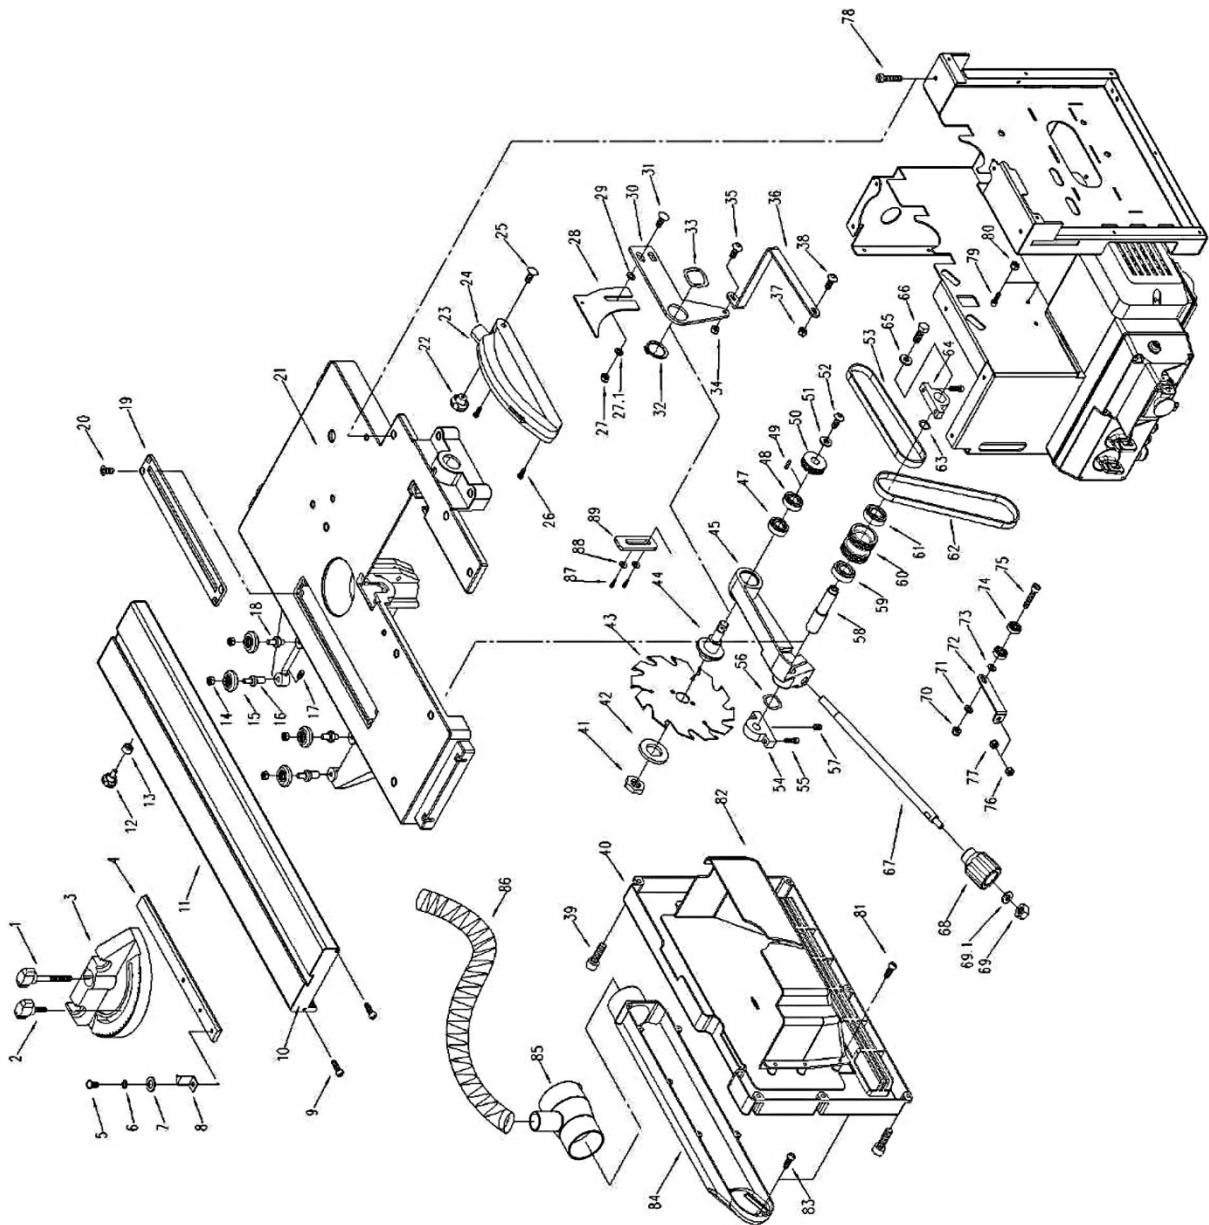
Spare parts drawing 2 Universal multiple combination machine UMK 6
